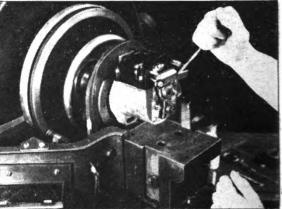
Method of Removing or Properly Meshing Distributor Gear with Steel Gear
